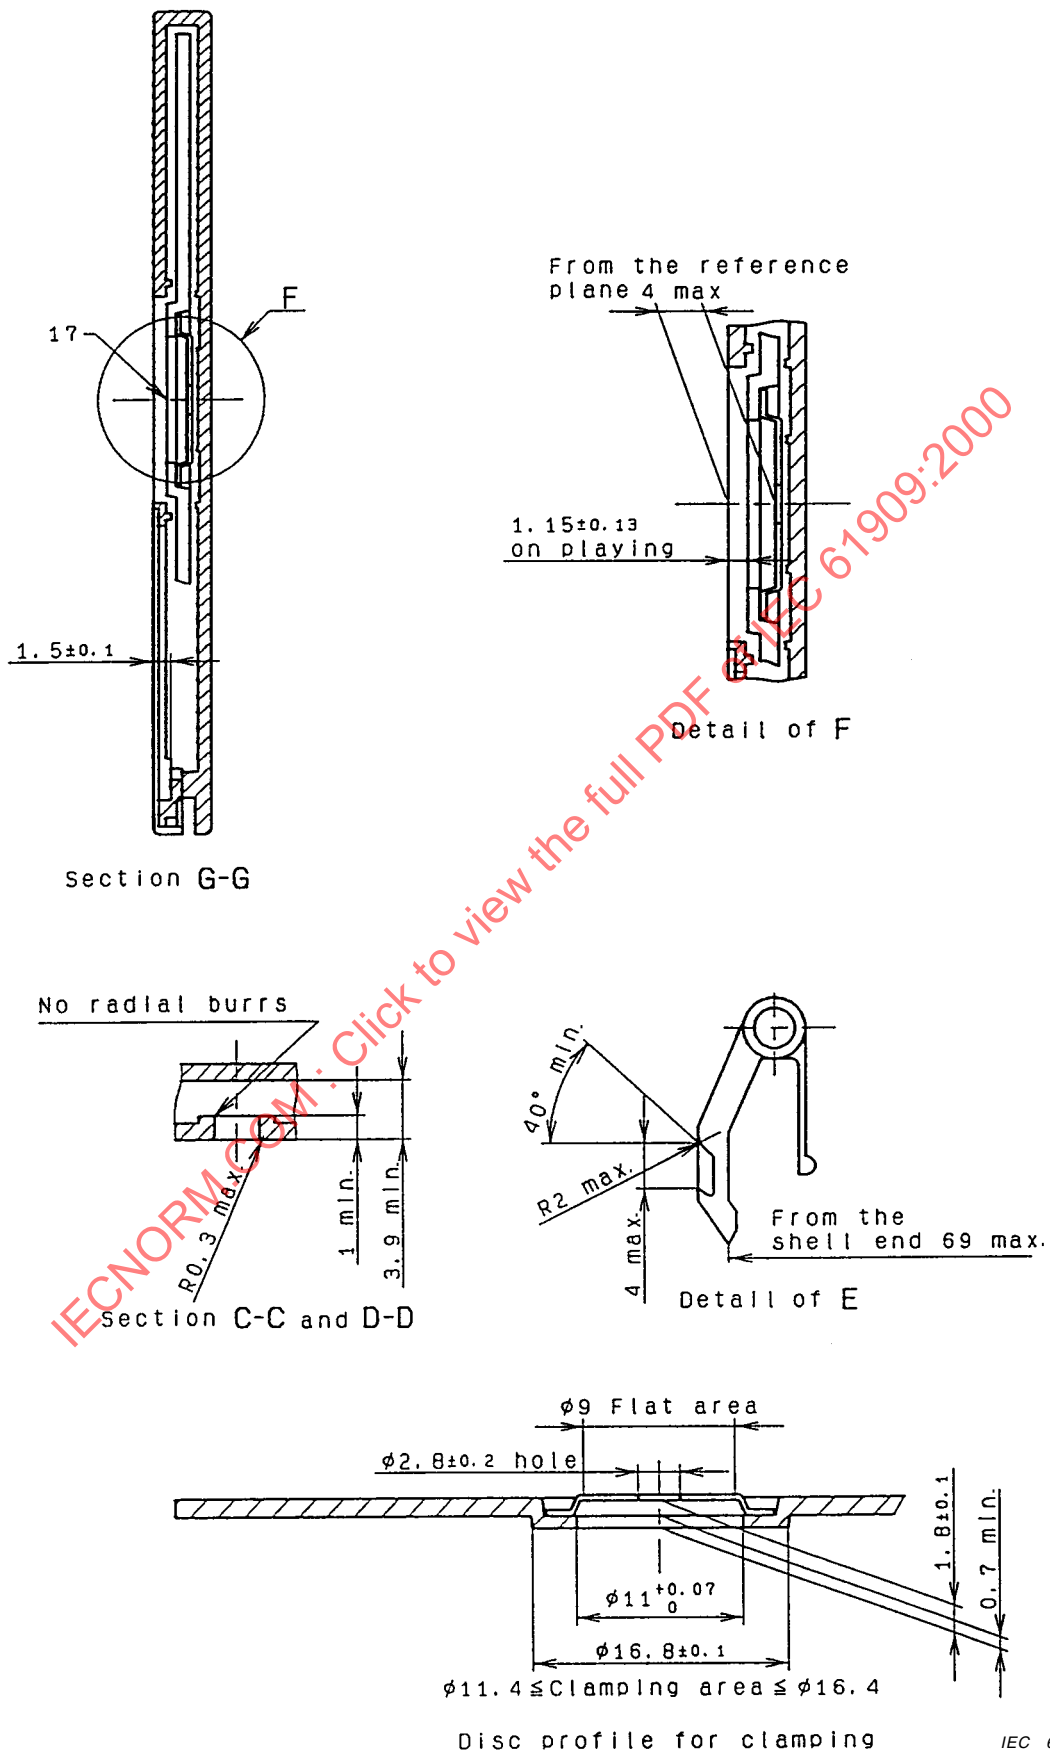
Bottom view and shutter of MD cartridge specifications for the premastered version
